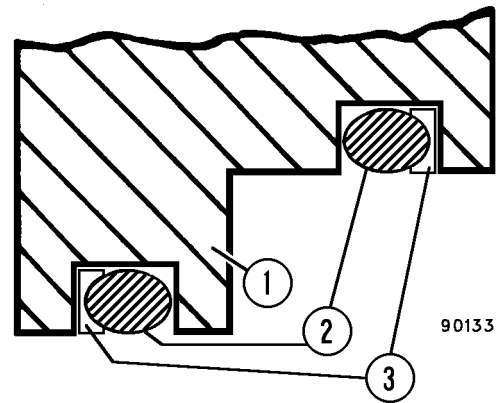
CORRECT INSTALLATION OF PACKINGS AND BACKUP RINGS IN PISTON HOUSING
